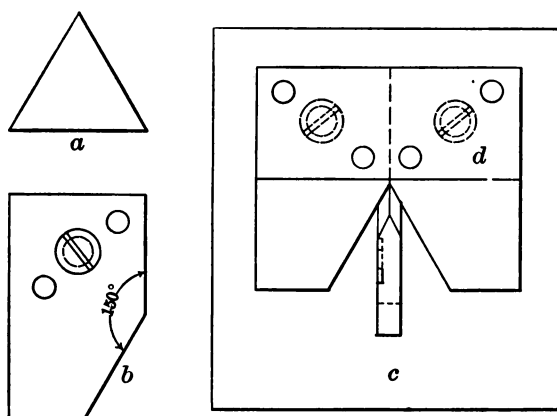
Gauge for Making a 60-Degree Thread Tool
